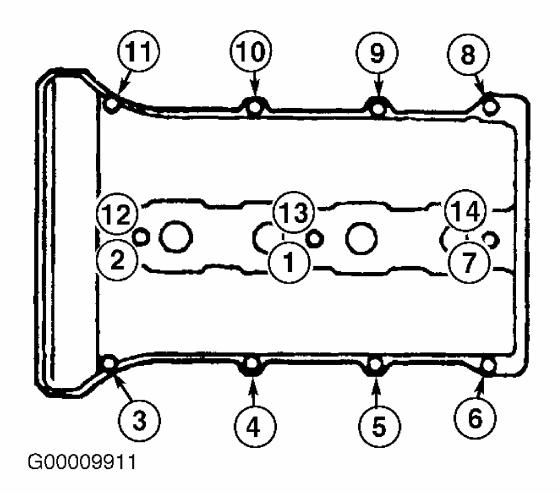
Valve Cover Bolt Tightening Sequence (Miata) Courtesy of MAZDA MOTOR CORP.
